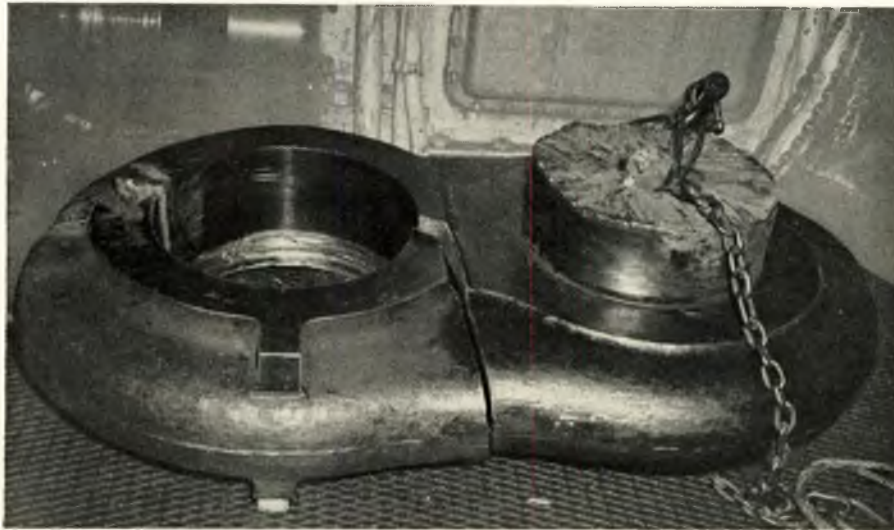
Fractured cast steel fully built crankweb (Case VII)
